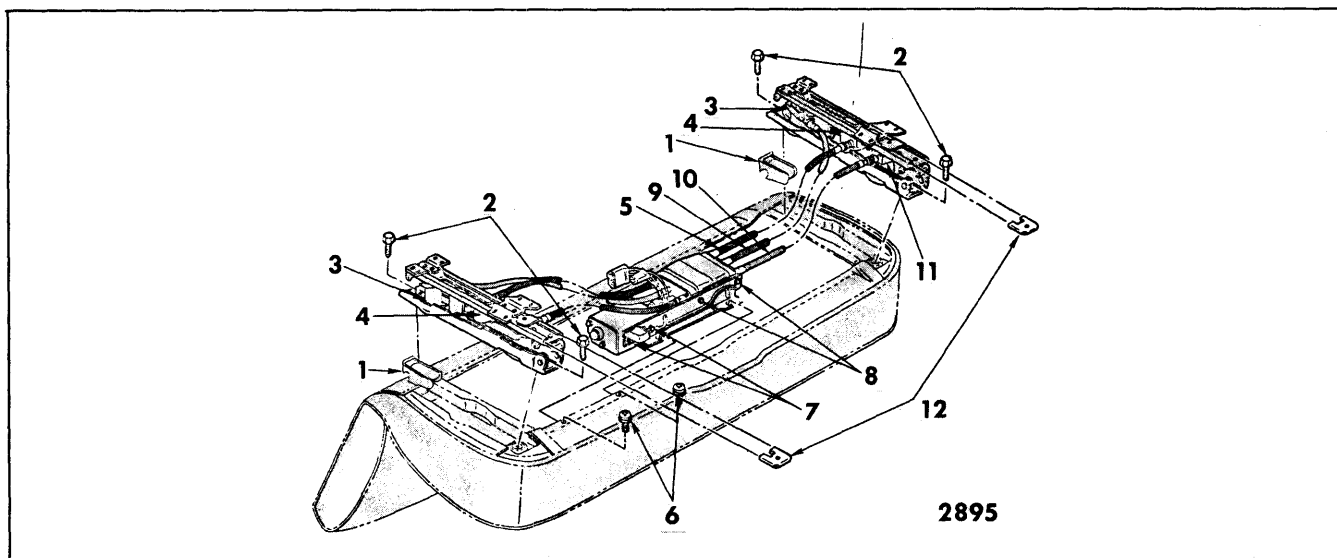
Front Seat Assembly—Six-Way - "B &amp; C" Full Width Seat
